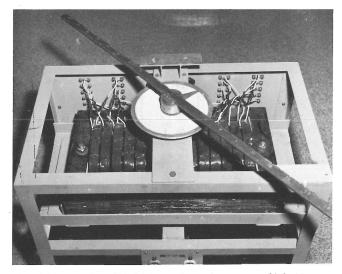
Top rear view of Model A-7.5 salient pole stator assembled with rotor.
